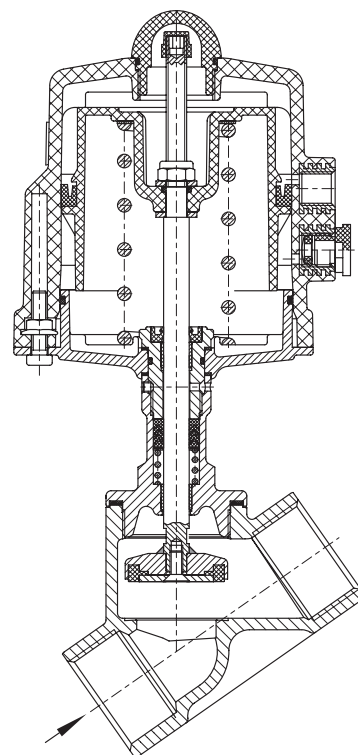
Type 3353 Angle Seat Valve Actuator with fail-safe action: fail-open
